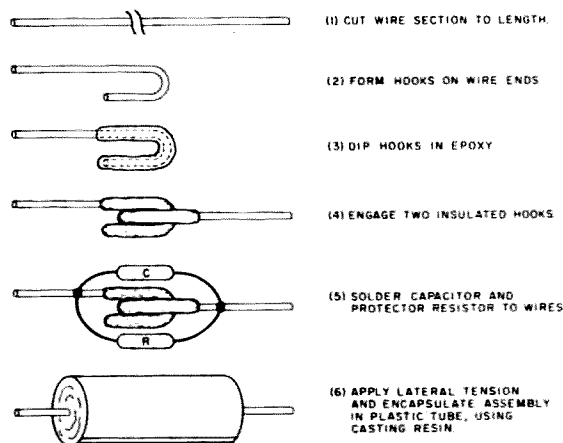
Steps for constructing one type of rugged weather-proof capacitor/resistor assembly.
